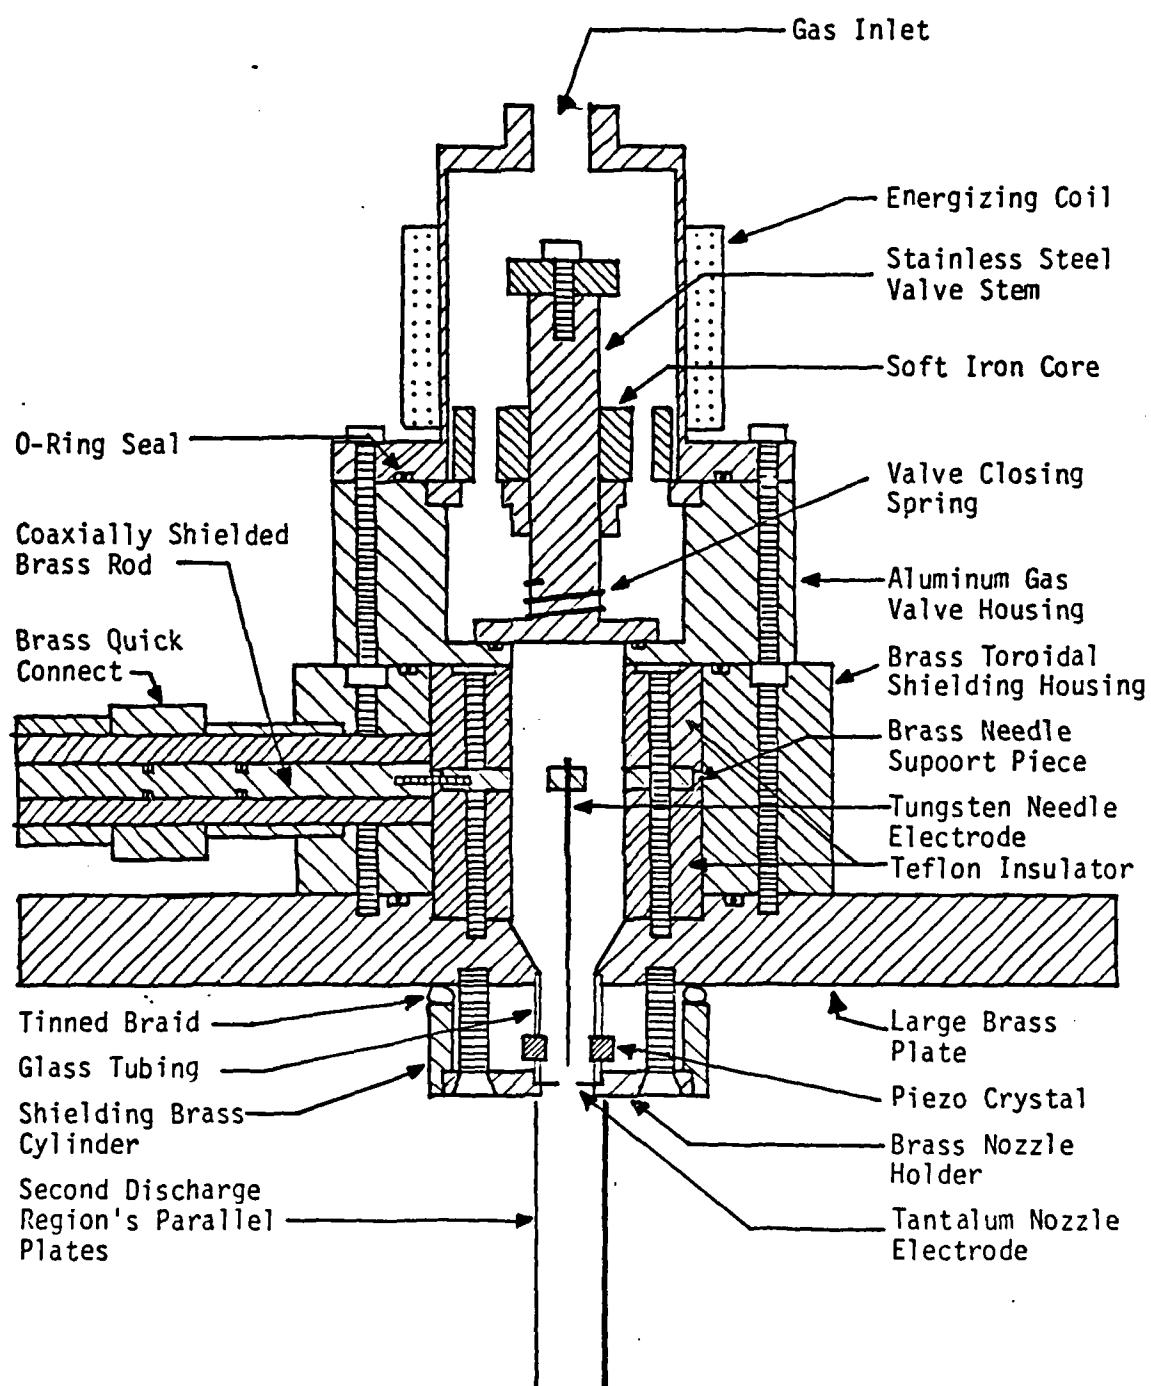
Side view of modified first discharge assembly including fast gas valve and part of second discharge region.
